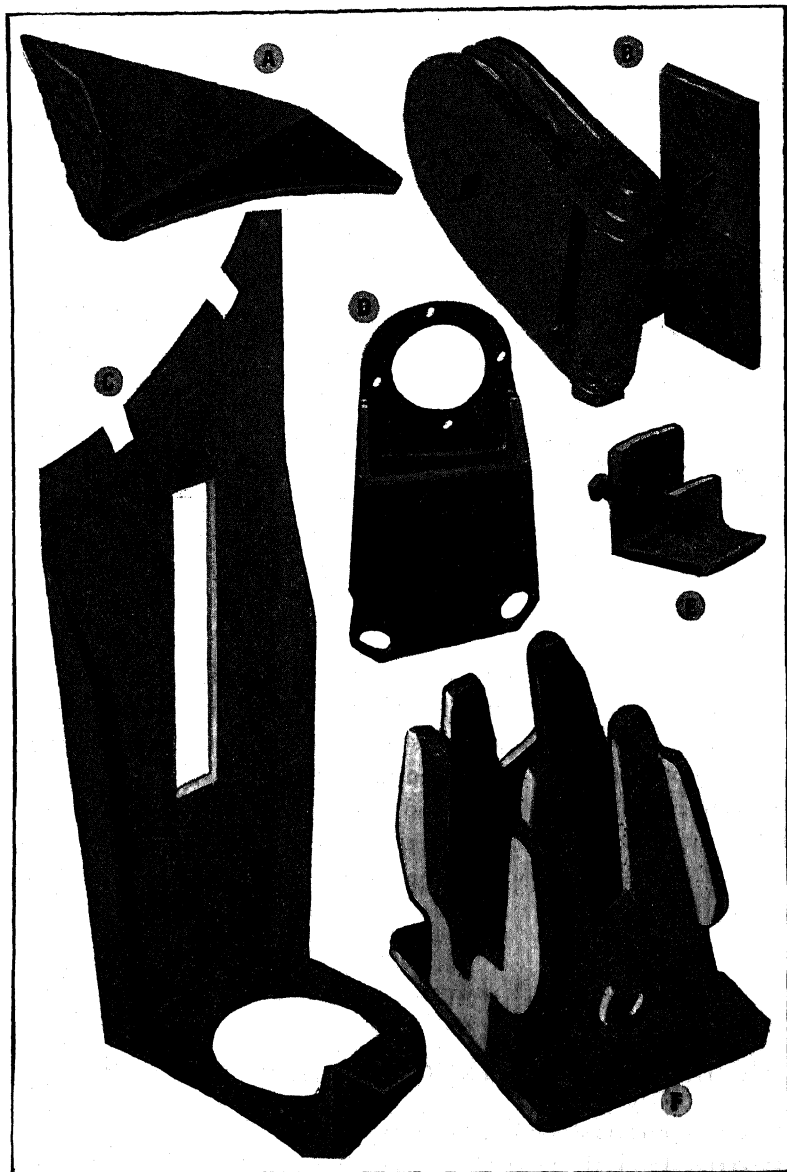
Brackets—(A) Engine step for crawler shovel. (B) Tagline fair leader and sheave for shovel. (C) Engine air cleaner support. (D) Oil pump bracket. (E) Gauge clamp. (F) Take-up rack for shovel chain control.
